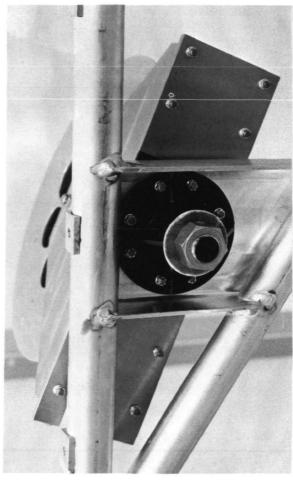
Same Assembly - Deployed Two ETB Bays
